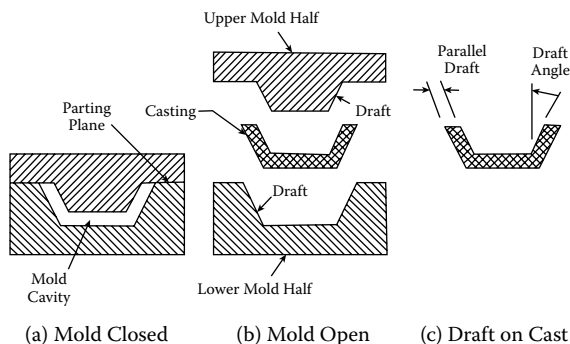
The mold is divided into two halves so that the final casting, core, or pattern can be withdrawn, (a) The mating junction between the mold halves defines the parting plane, (b) Draft provides ejection clearance upon mold half separation, (c) With draft, walls and other features cannot be exactly perpendicular to the parting plane
